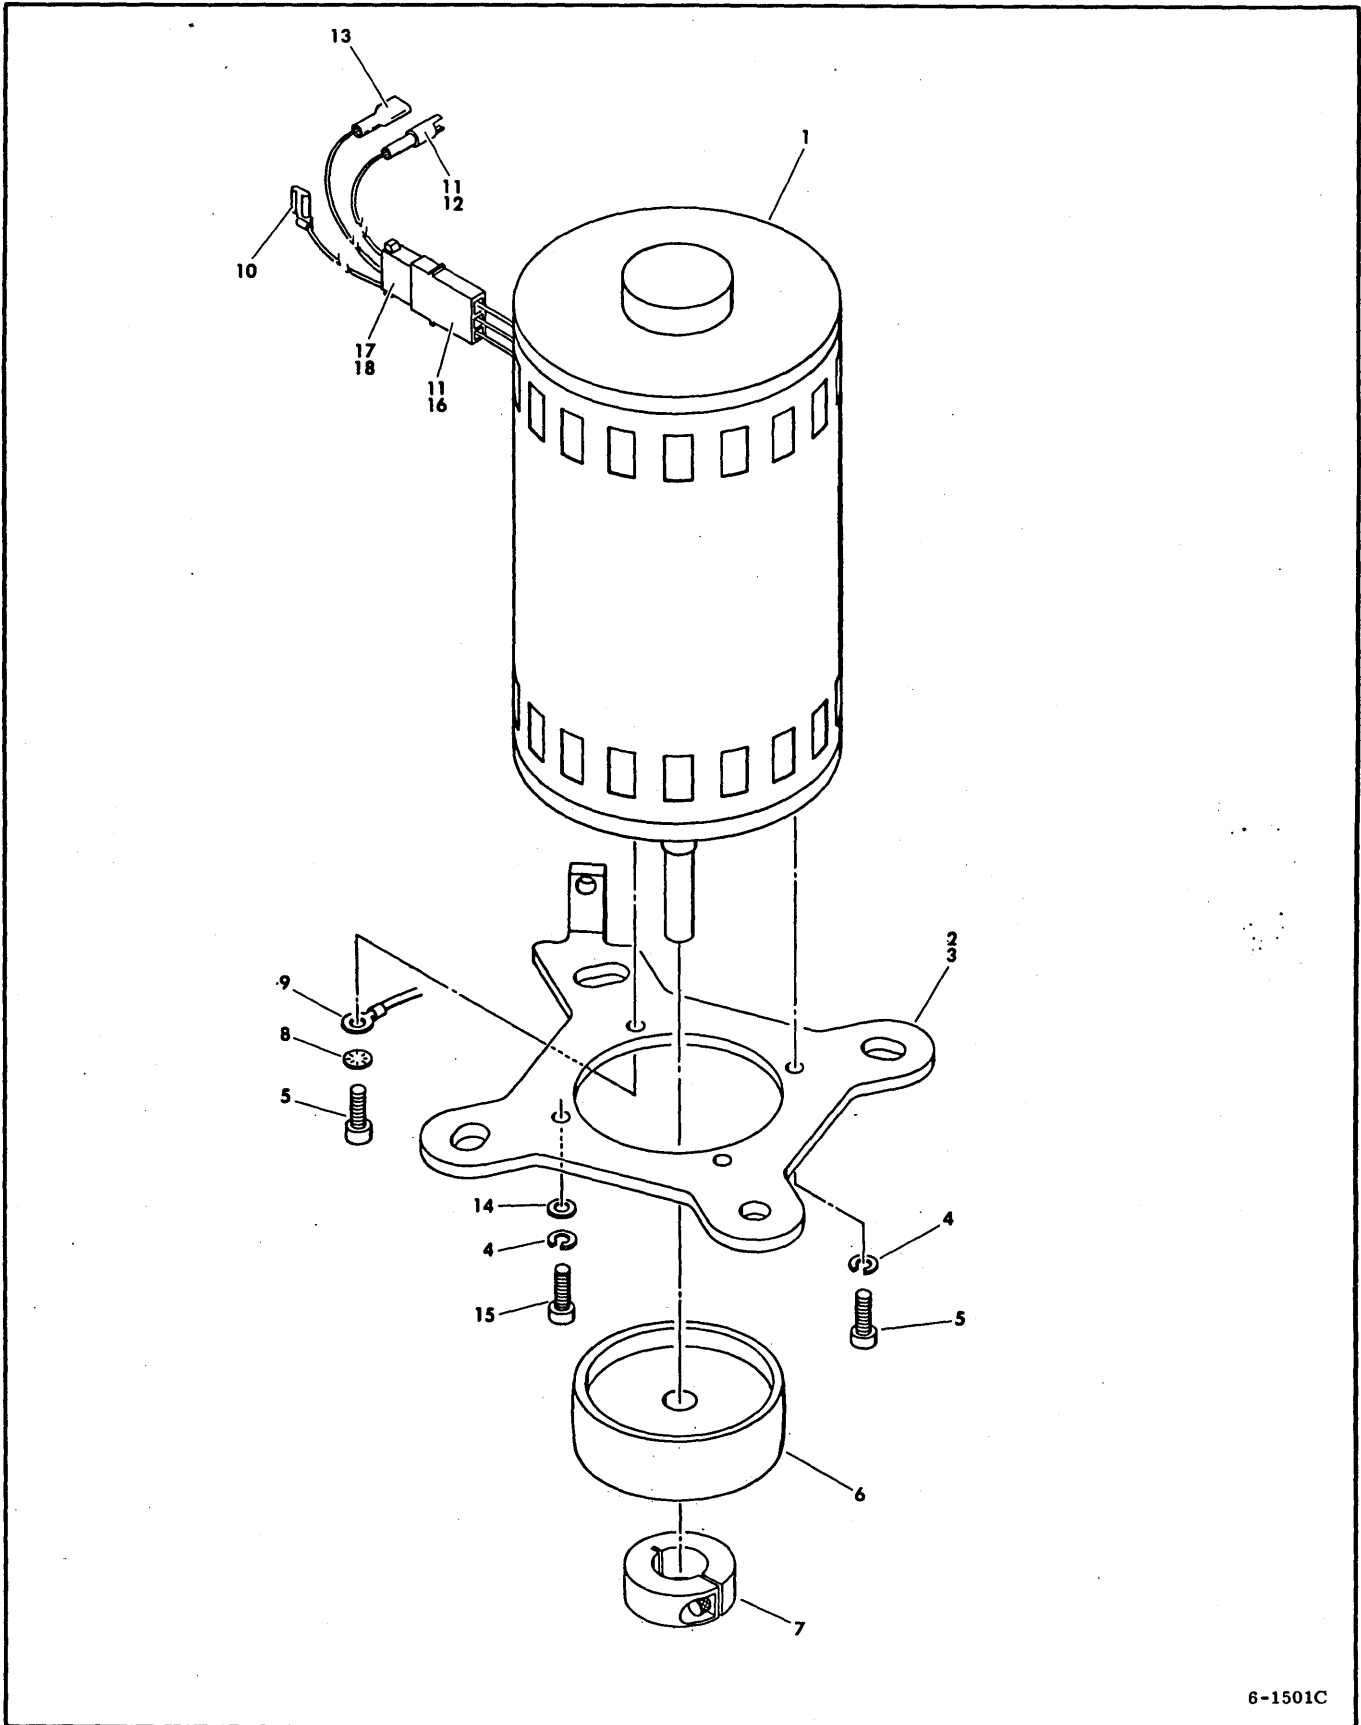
Component Assembly, Type_XKV (Sheet 2)
